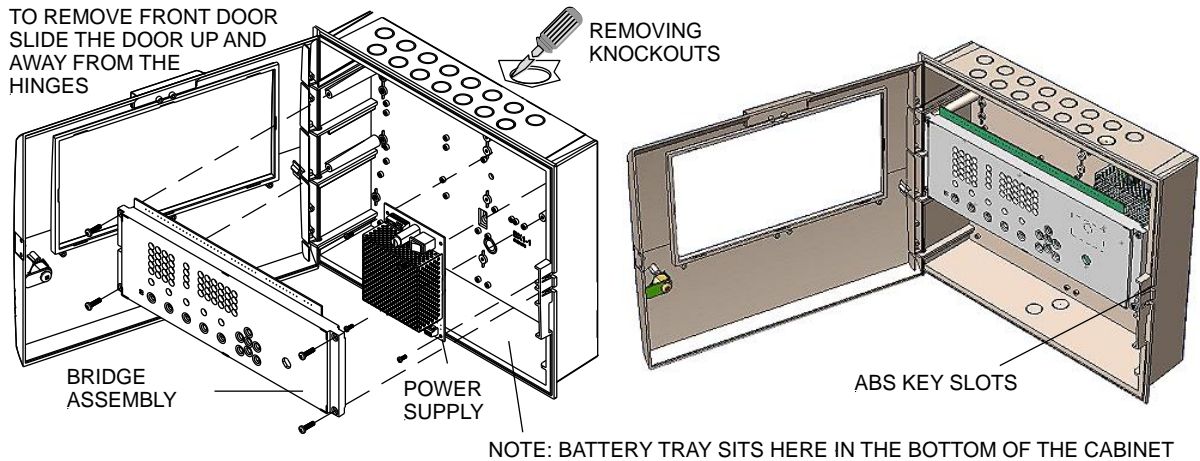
Exploded and Assembled View of the Basic ABS Model FACP with 003 Key Entry
